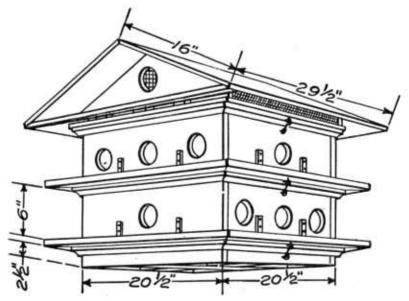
Martin house in which the foundation, roof, and each story are built as units of uniform lateral dimensions, permitting the addition of more stories as the colony grows and allowing ready access for cleaning. A central air shaft and an elevated roof, permitting the passage of air beneath the eaves, assure a cool temperature for the interior. A cove molding around the underside of the roof and each story holds the parts in alignment, and pairs of hooks and screw eyes fasten the units together
